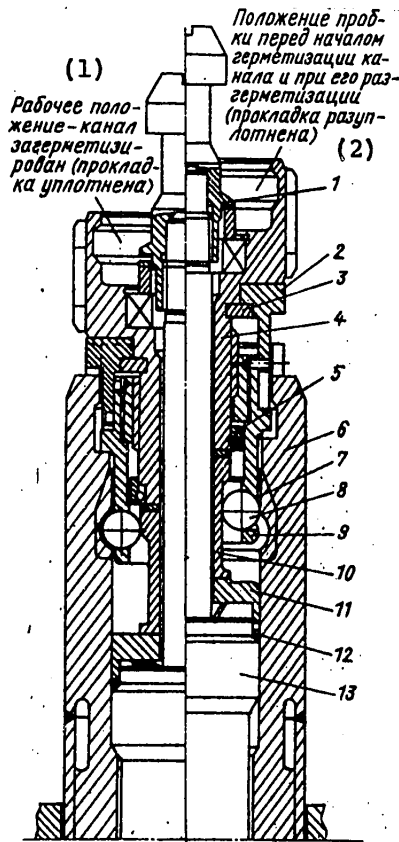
Locking Device of Channel: 1--shank; 2--flange; 3--semiring; 4--screw; 5--locking ring; 6--channel housing; 7--surfacing; 8--ball; 9--plug housing; 10--spacer; 11--clamping sleeve; 12--gasket; 13--suspension housing
